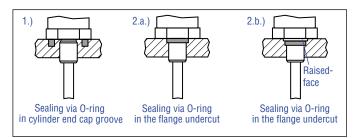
Possibilities of sealing for threaded flange standard 1. + 2.a. (RH5-J/-M/-S) and for threaded flange with raised-face 2.b. (RH5-T)
